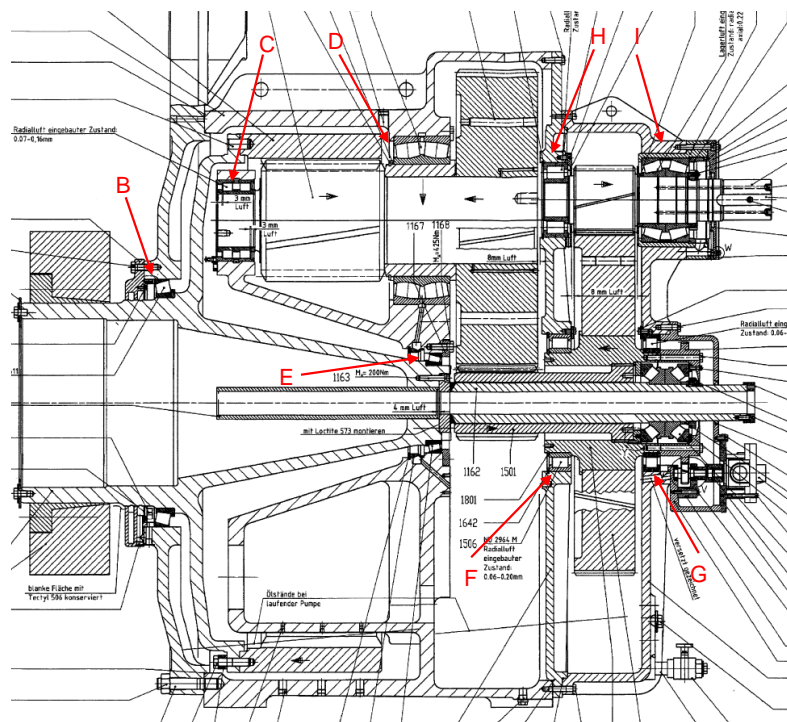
Extract of the Gearbox assembly plan. Courtesy of Senvion
